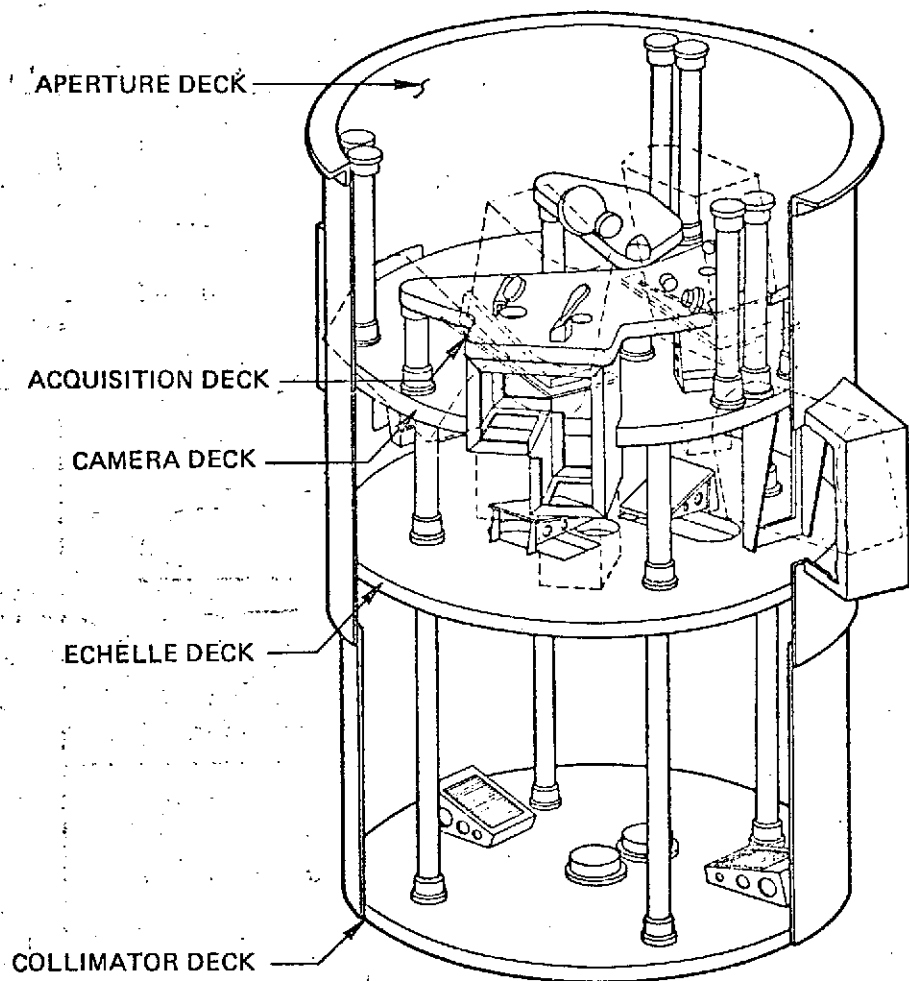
CUTAWAY VIEW OF SPECTROGRAPH ASSEMBLY
